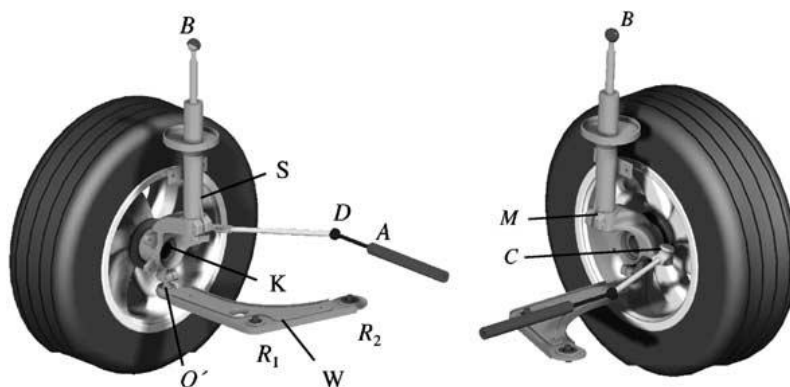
Front and rear view of the characteristic parts of the left front wheel.
